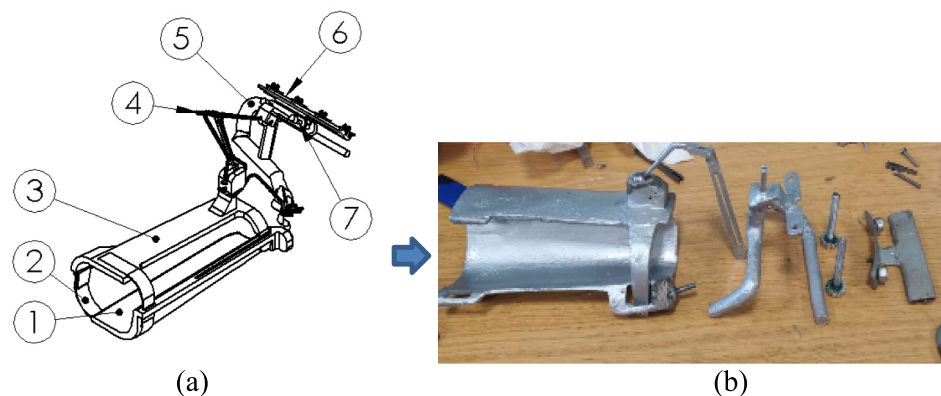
Robot manipulator a) The CAD model b) Mechanism linkages
